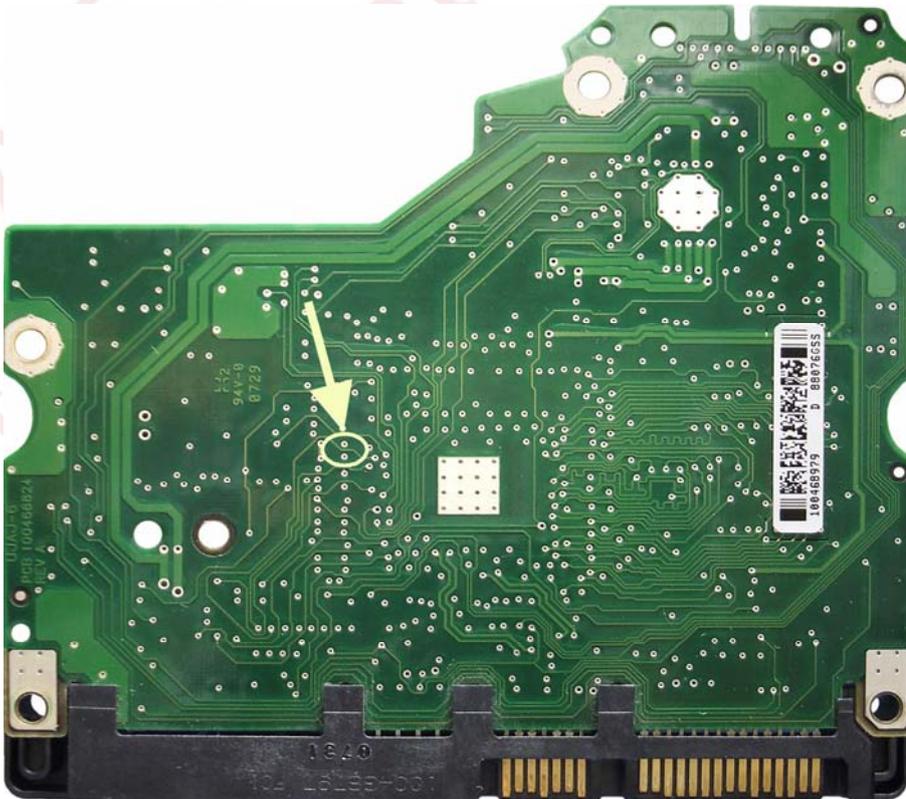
Board view from the external side. Connection points are marked in yellow.
